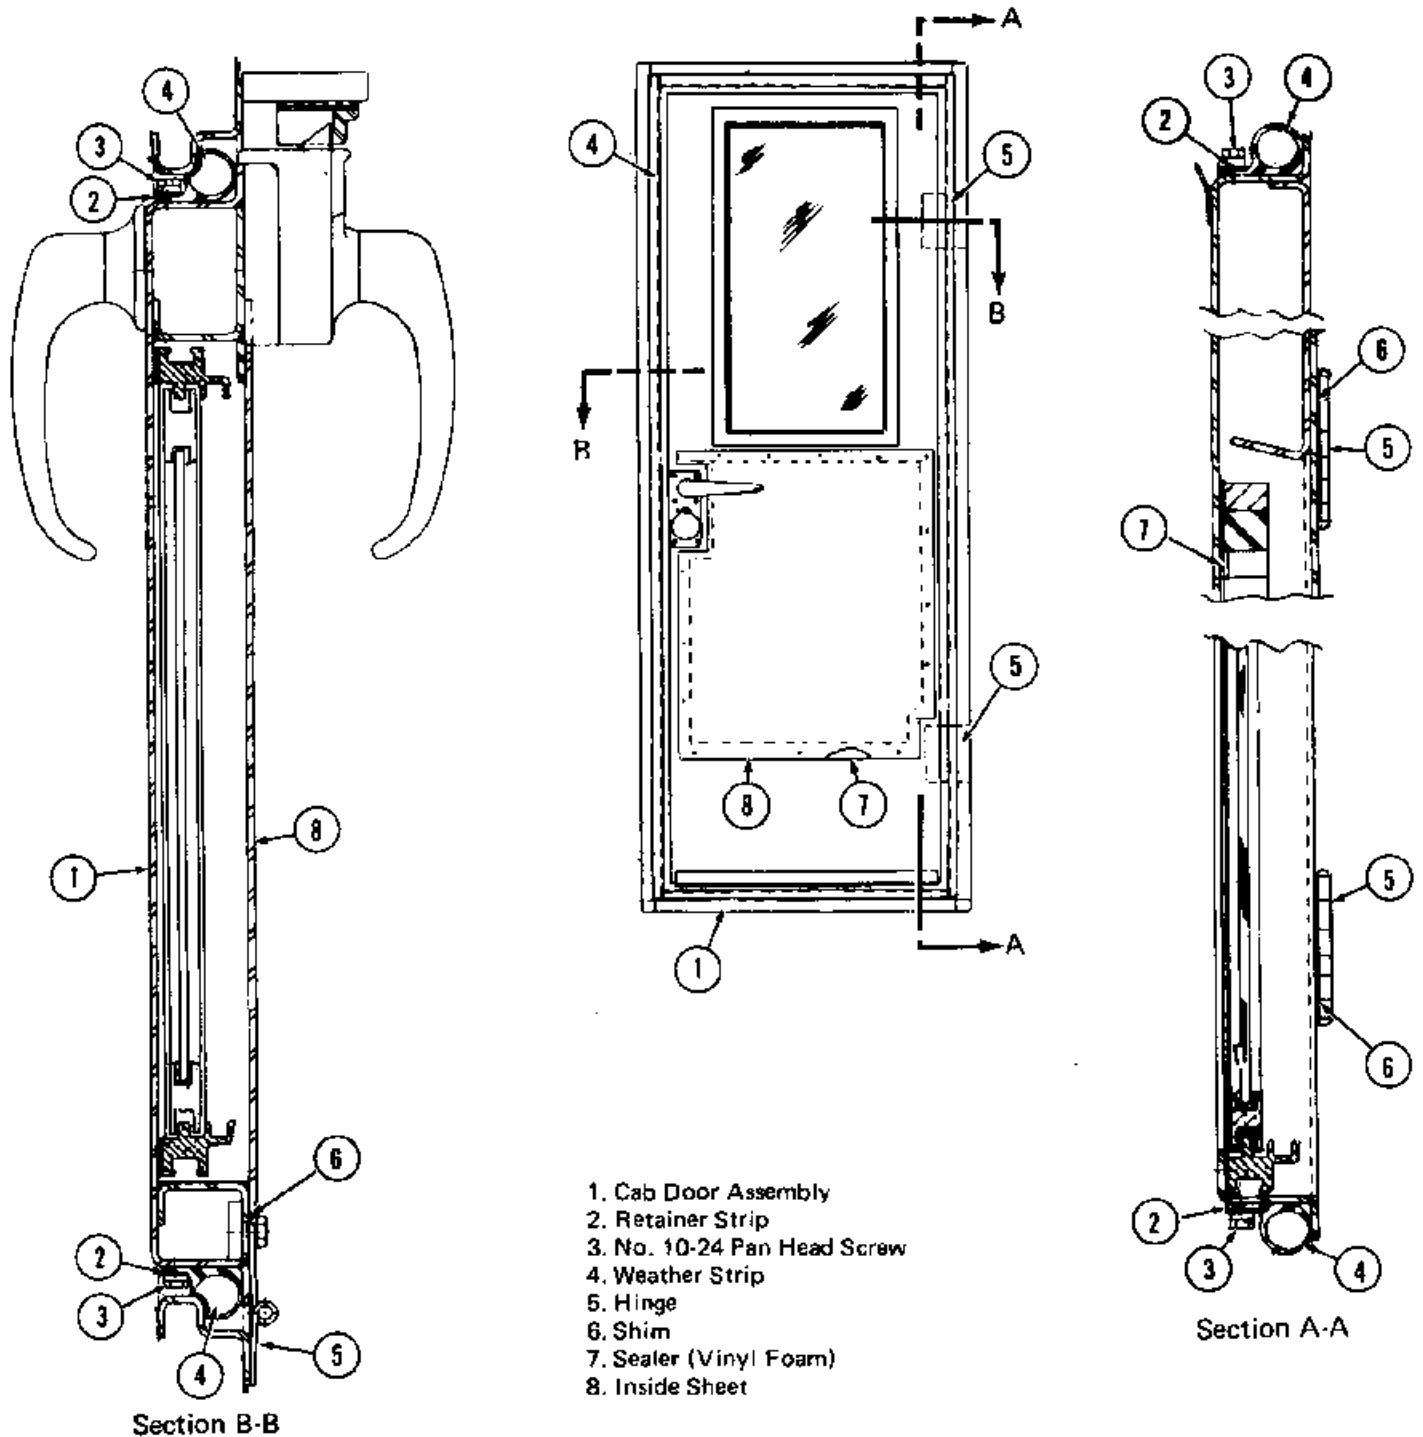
Cab Side Door/Compression Type Tubular Strip
